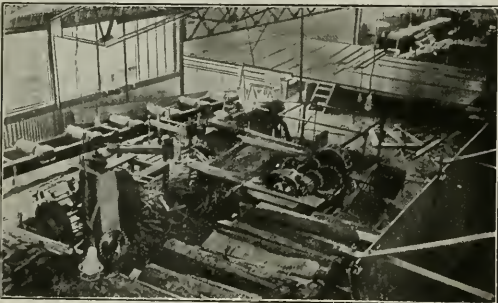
LATH MILL SHOWING DIRECT-CONNECTED MOTOR DRIVING LATH BOLTER AND LATH MACHINE
